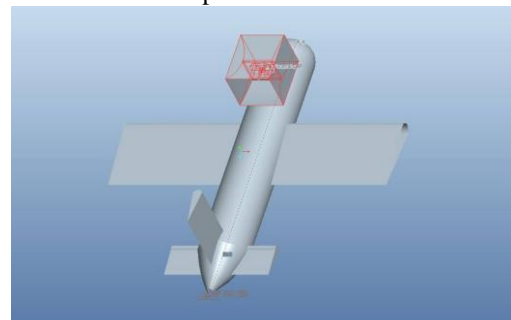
Assembled side view of Fog reducer above aircraft [8]
